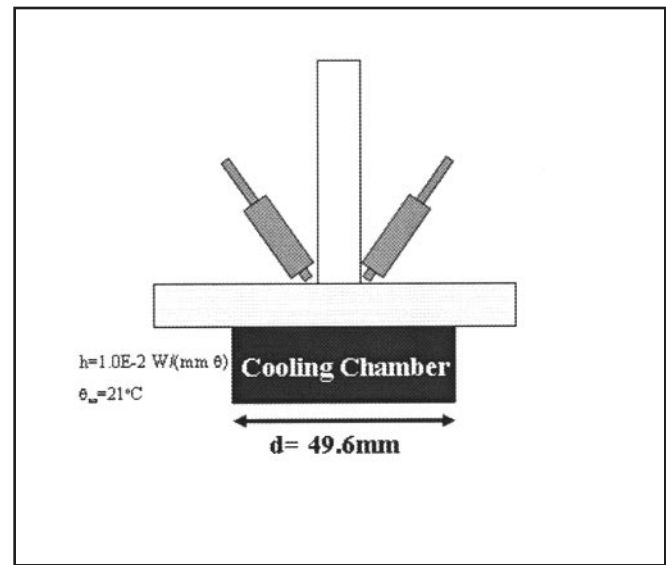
Scheme of heat sinking applied to the T-joint.
